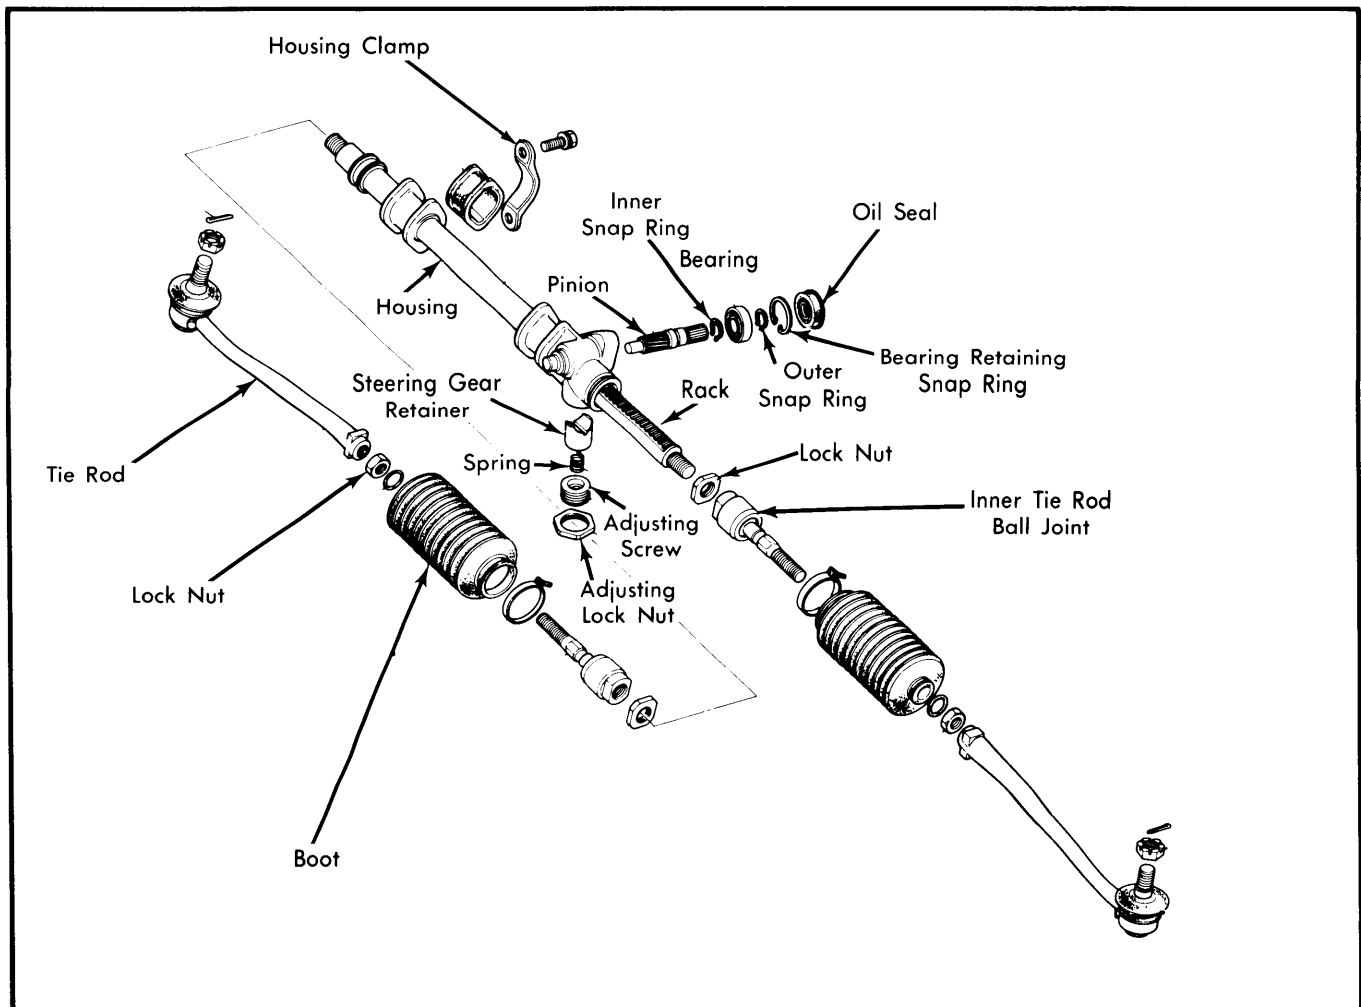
Exploded View of Rack & Pinion Steering Gear Assembly
